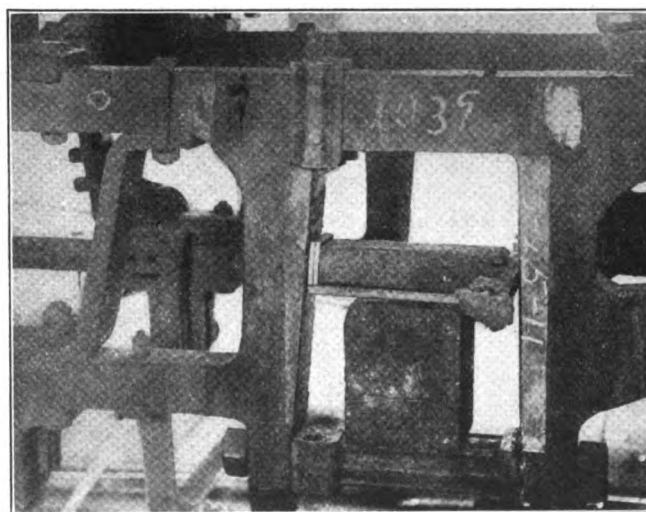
SHOWING PIECE INSERTED IN CENTER AND PADS PUT ON EACH SIDE WITH STUDS
